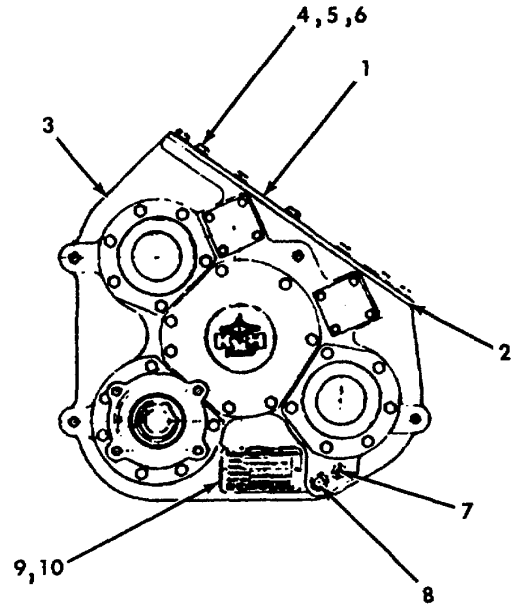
MANUAL FRONT DRIVE DECLUTCH
